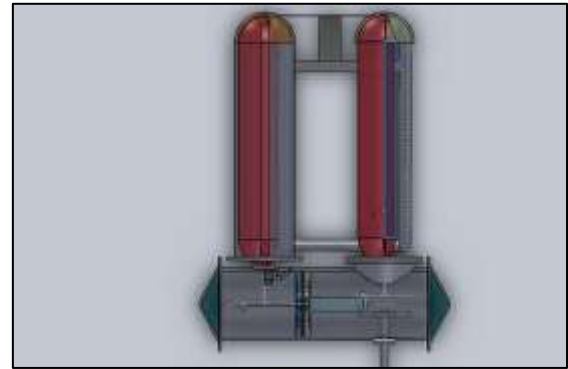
Top view of two rotating displacer powering the horizontal piston. Regenerators and radiator removed for clarity
